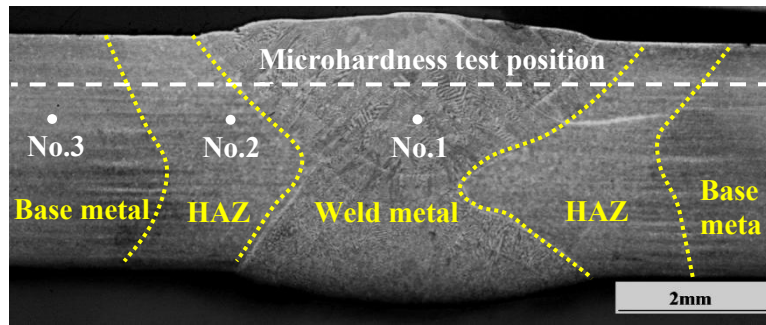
Macro-morphology of 18Ni maraging steel weld
